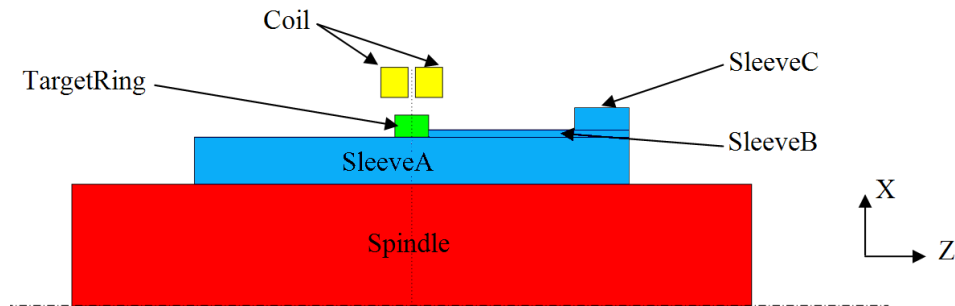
Build up of analysis model showing the four main parts. The sleeve part is built with three parts and merged thereafter.
